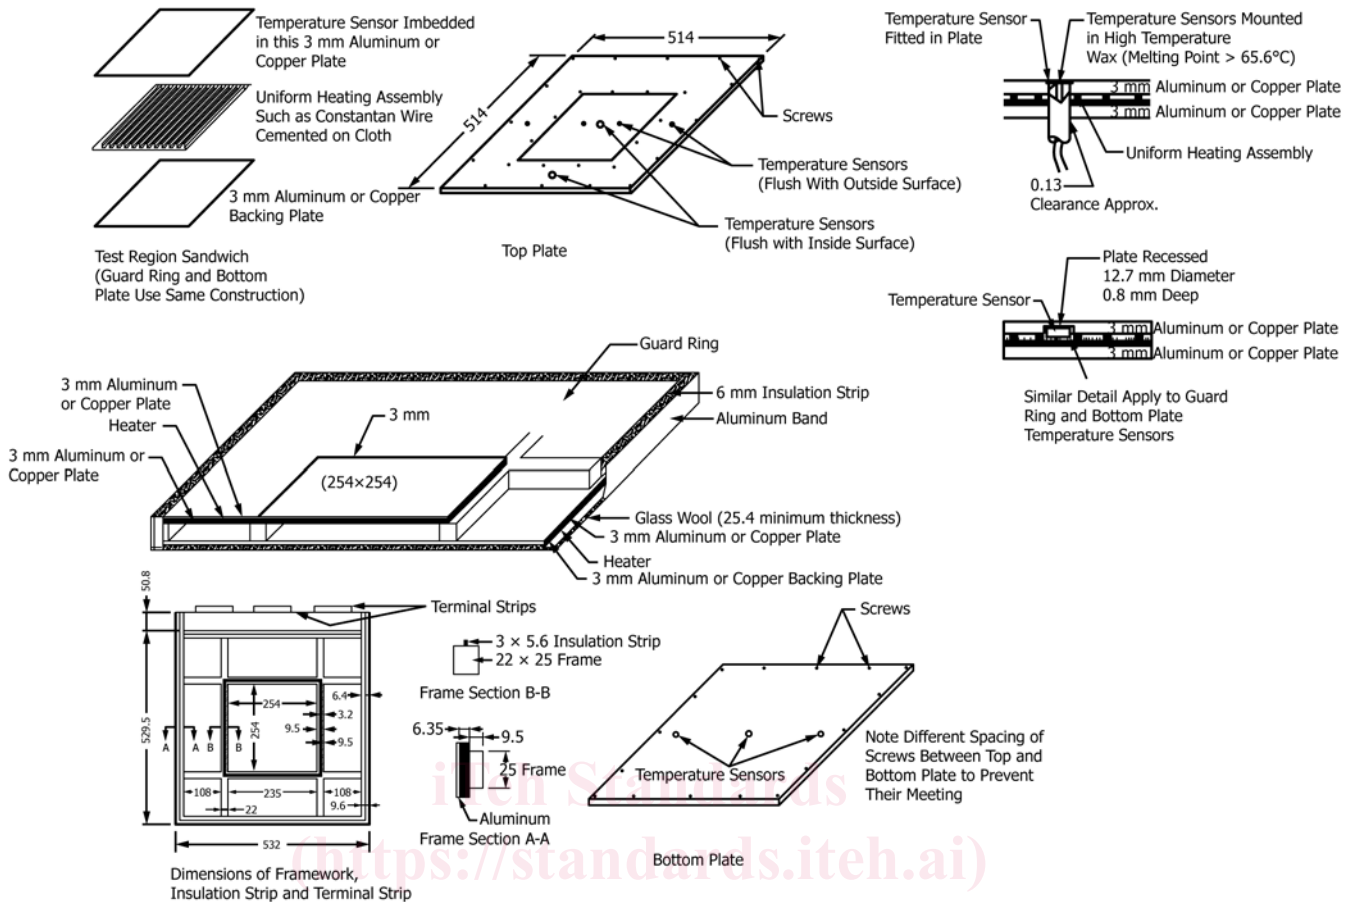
Example of a Hot Plate Apparatus, Dimensions in mm
